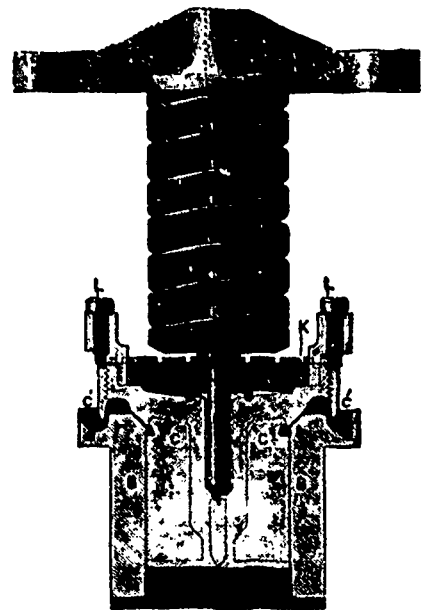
RICHARDSON'S OPEN LOCOMOTIVE "POP" SAFETY VALVE, WITH ADJUSTABLE SCREW RING.
